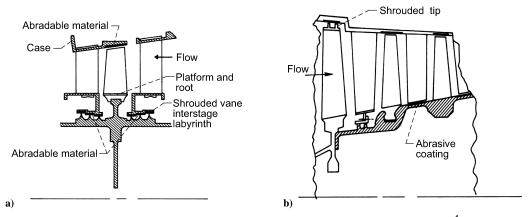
Compressor sealing locations: a) blade tip and interstage and b) drum rotor.<sup>4</sup>
